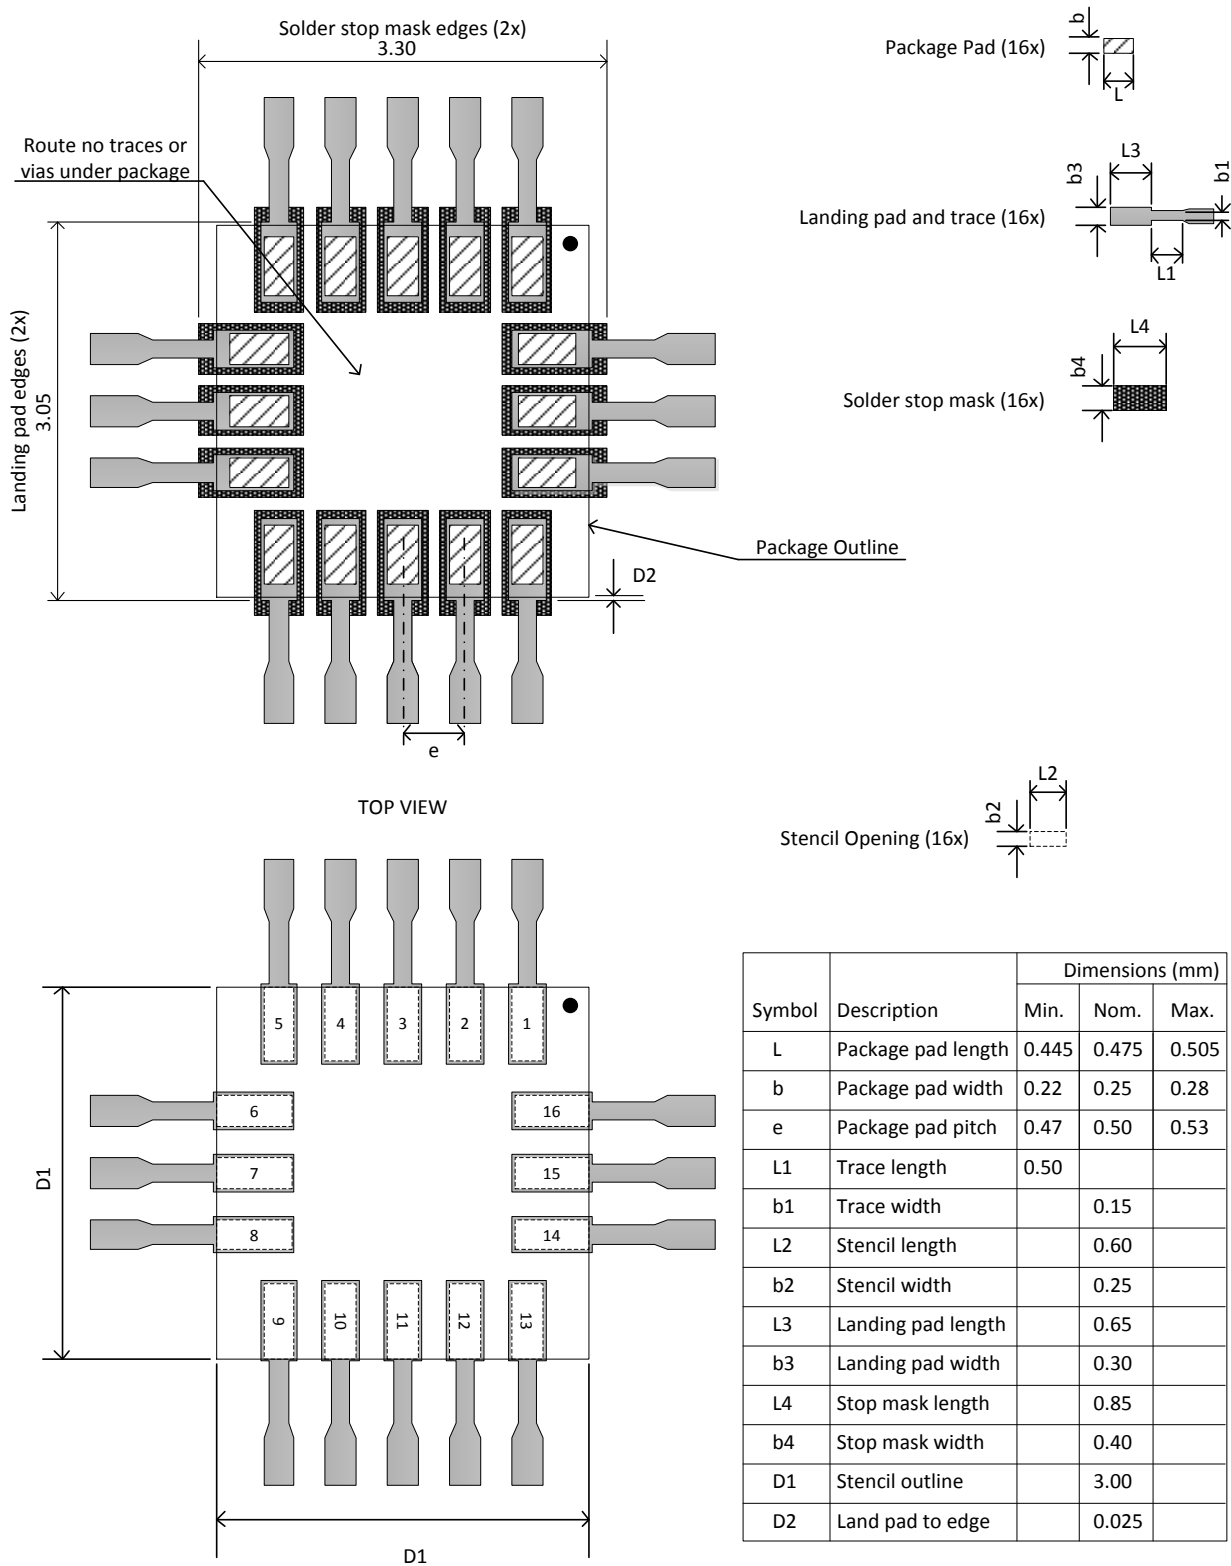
PCB and Stencil Design Recommendations (16-pin 3x3mm Package)
